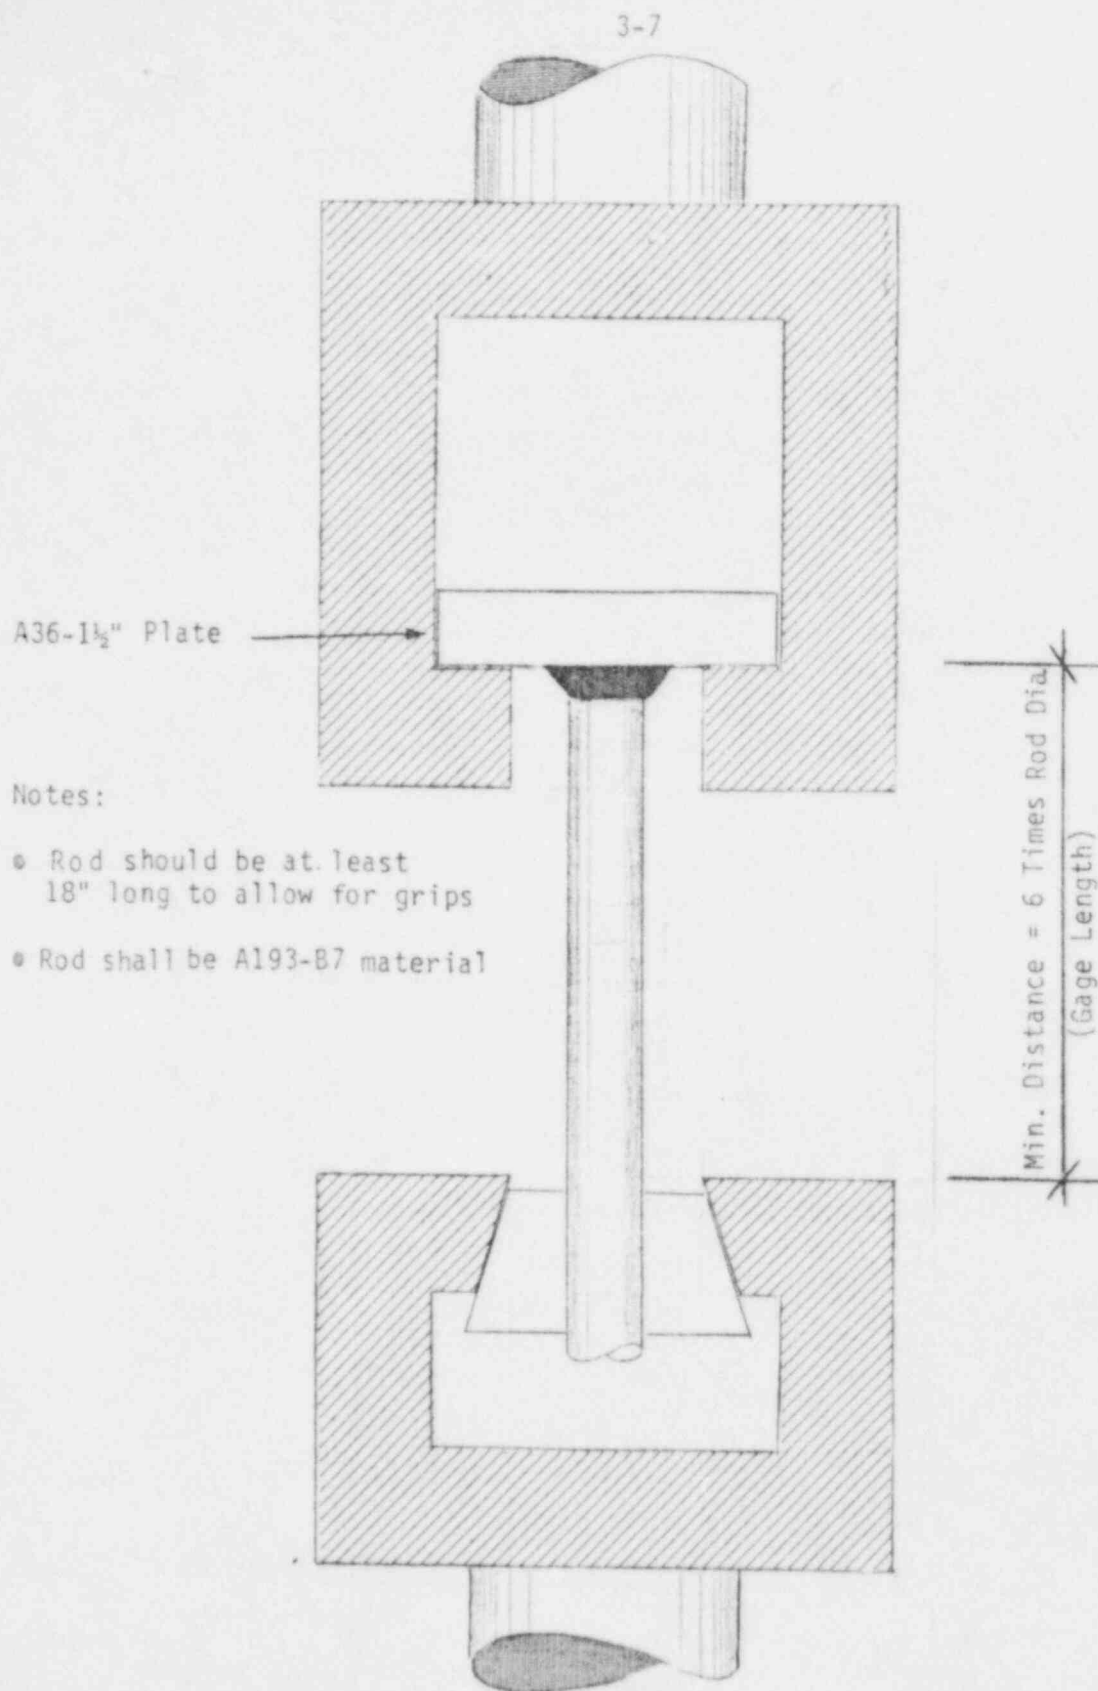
Weld Test Apparatus and Specimen.
